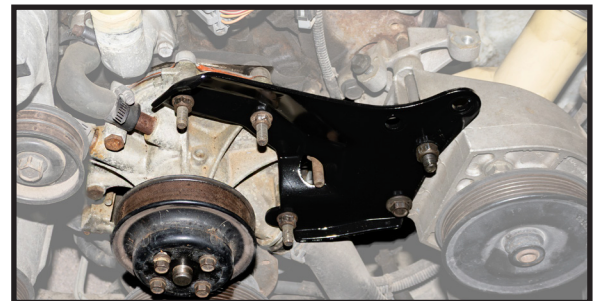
Reinstall the OE Front Compressor Mounting Bracket
